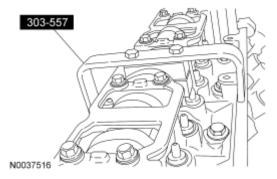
Installing Special Tool Courtesy of FORD MOTOR CO.
